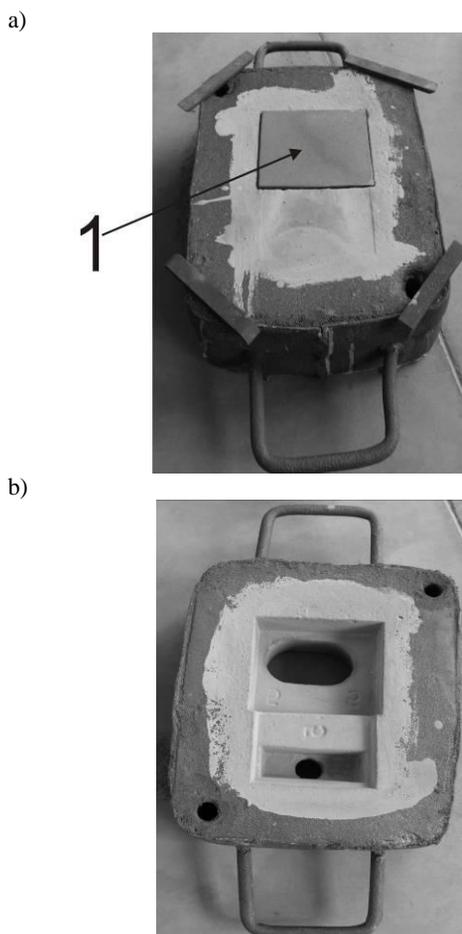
View of sand mould with plate of austenitic steel (1) placed in its cavity: a – bottom half of mould, b – top half of mould
